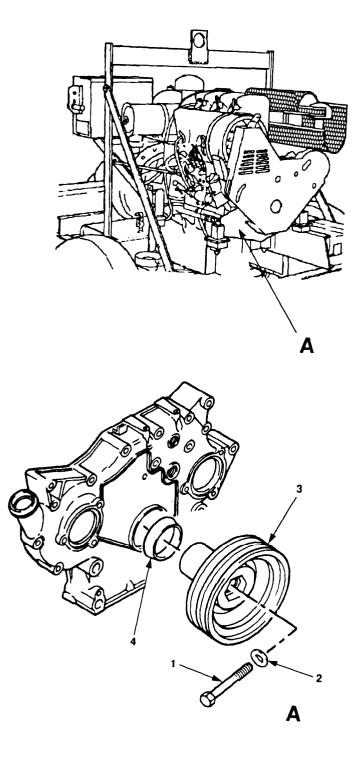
Crankshaft Pulley and Seal Maintenance.
